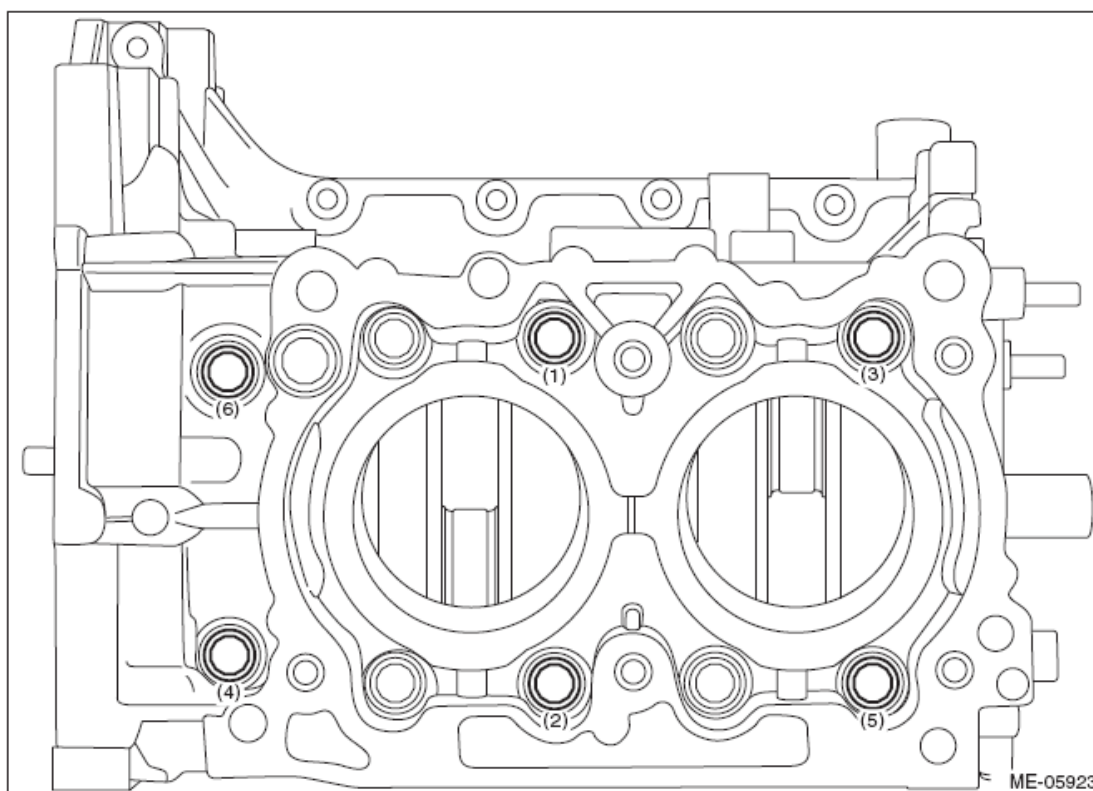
Identifying Cylinder Block Mounting Bolts Tightening Sequence
